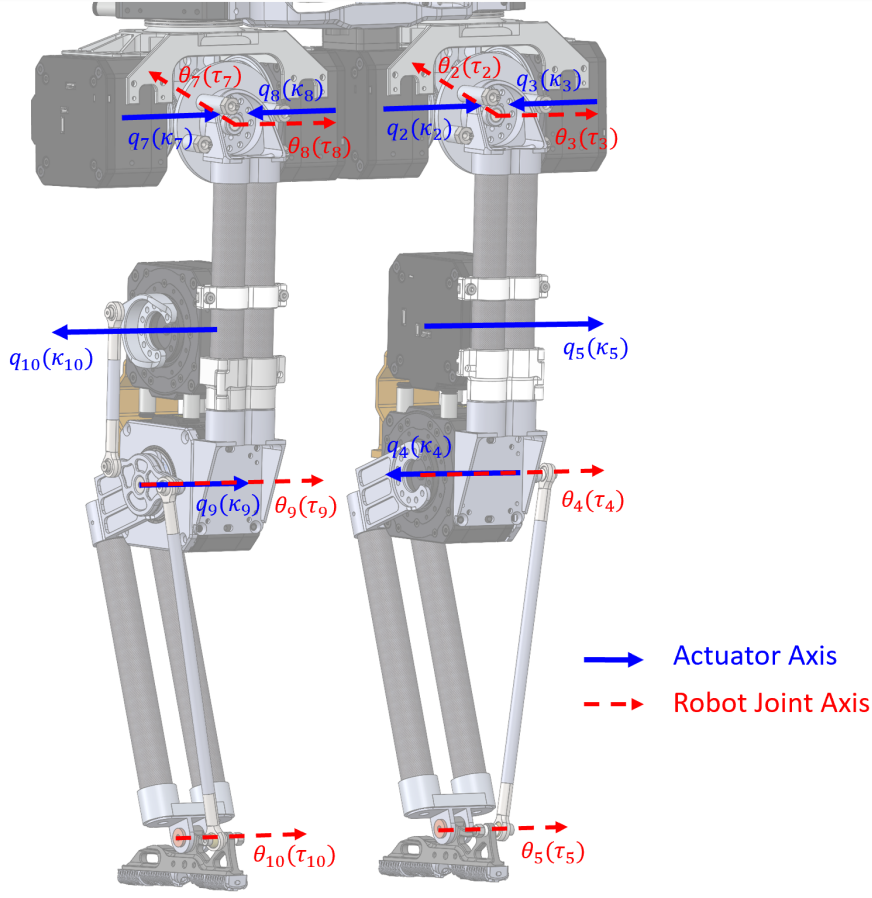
Robot joint axis and actuator axis on BRUCE lower body
